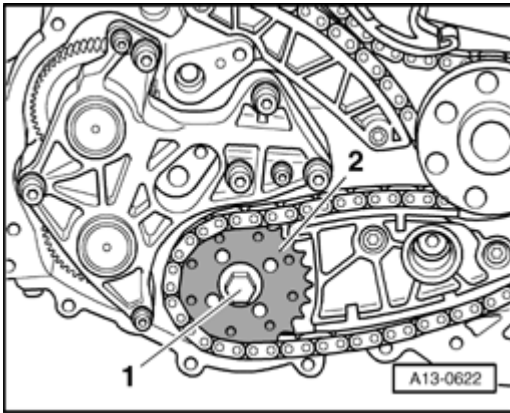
Loosening/Tightening Bolt On Drive Sprocket
